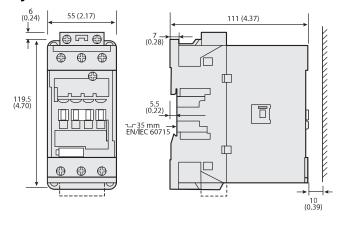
100-E40...100-E65 3-Pole Contactors with Frontmounted Auxiliary Contact
